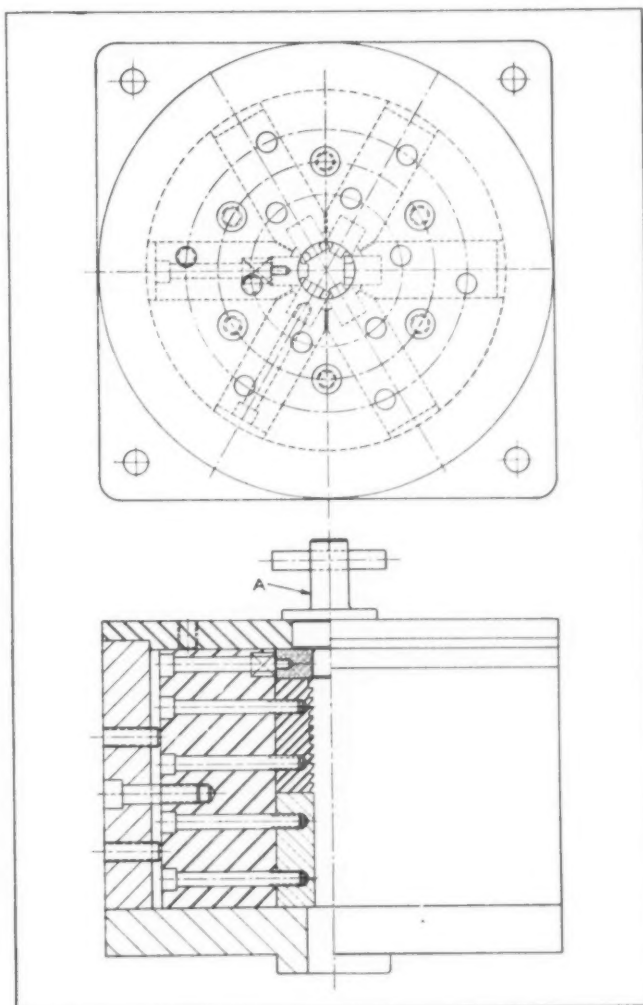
Plan and Sectional Views of Broaching Fixture Illustrated in Fig. 1
